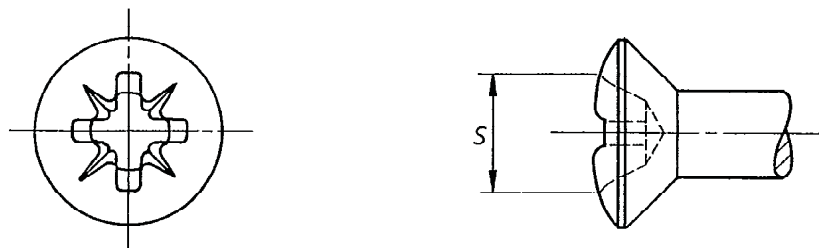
Recessed raised countersunk head machine screws: enlarged views of recess type Z
